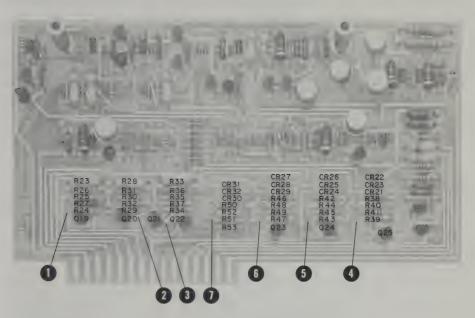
A3 Relay Driver Assembly Component Identification for Inverters and Remote S-Parameter Select Decoder Serial Numbers Prefixed 906- and Above
